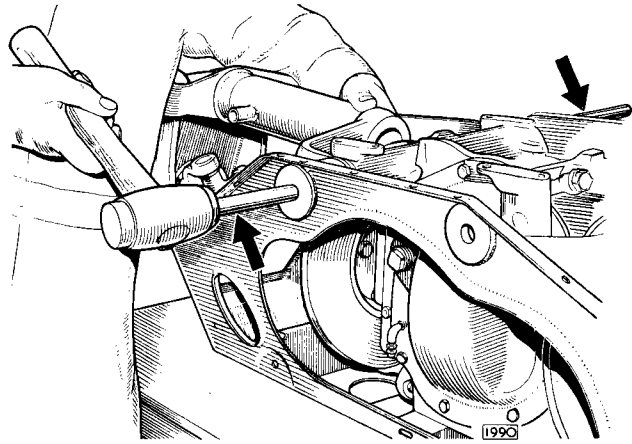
Tapping the dummy shafts into position at the wishbone inner fulcrum
